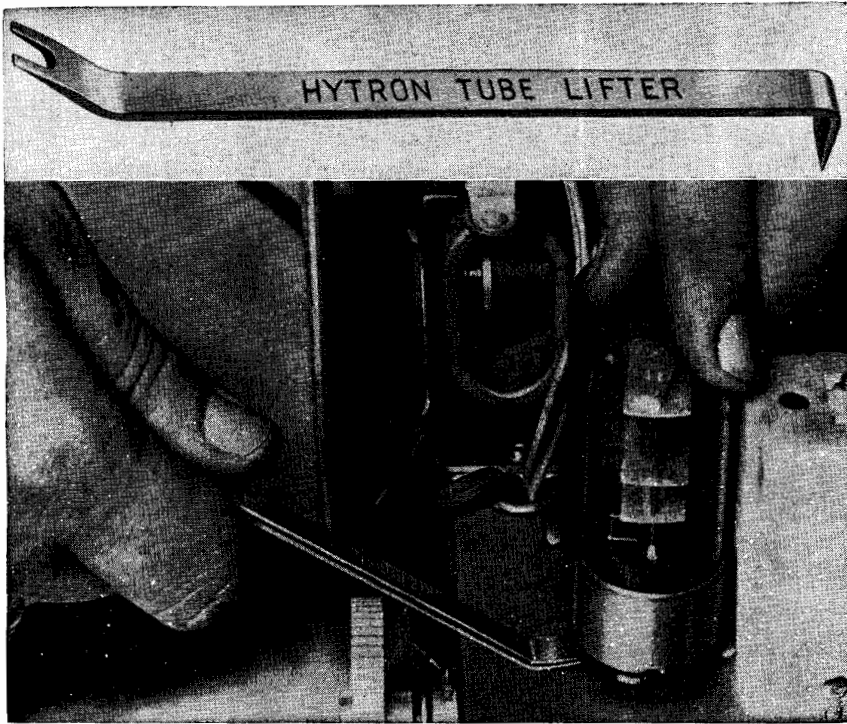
Handy tube lifter and method of using it. Disconnect set from power line, tip tube slightly, insert tapered end of lifter under base so it goes around one pin, then press lifter handle down while guiding tube vertically with other hand. Use right-angled end when tubes are crowded together, as in television sets and in compact auto radios. (Hytron photo)
